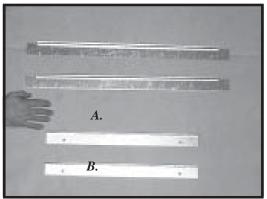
A. Rear door angles - top and bottom. B. Rear door angles - sides.
